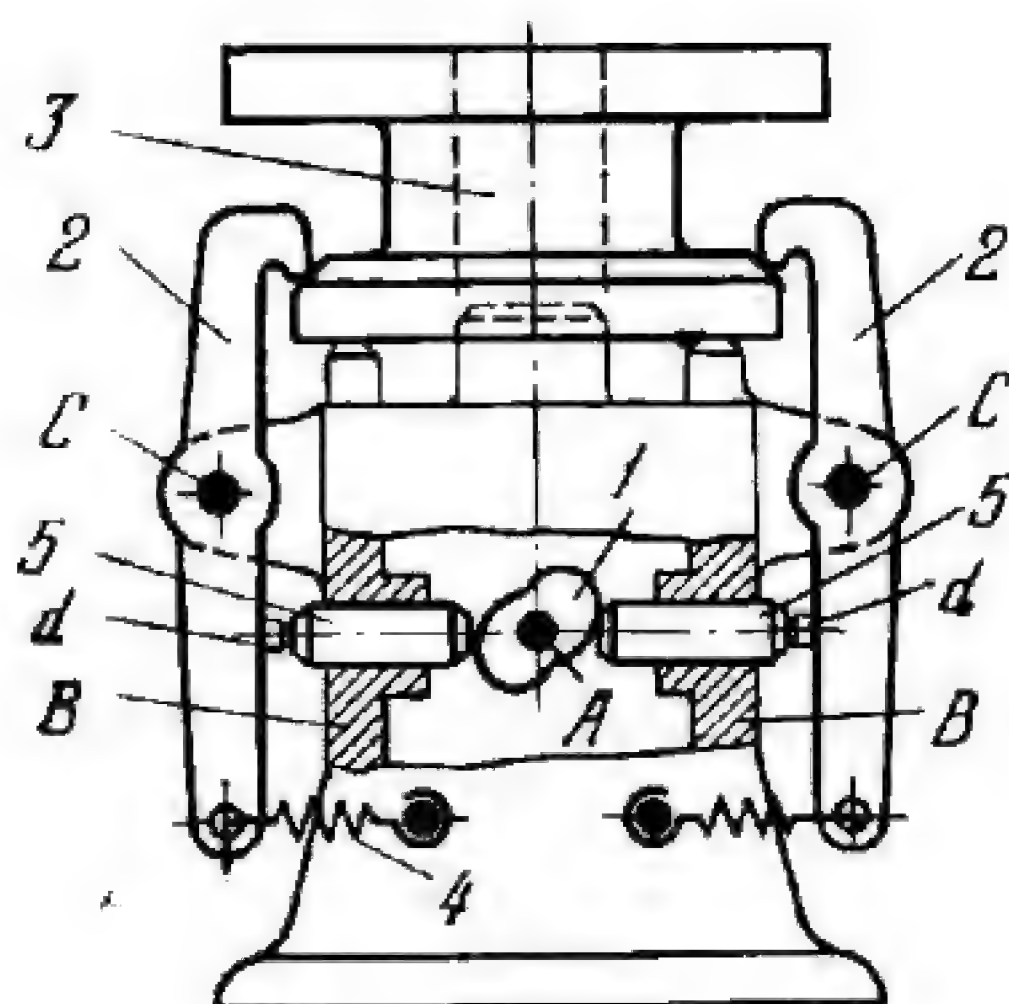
turns about fixed axis A and acts on symmetrically located pins (followers) 5 which slide in fixed guides B. When cam 1 is turned clockwise, pins 5 push against buttons d of hinged clamps 2, turning the clamps about fixed axes C to clamp workpiece 3. To release the workpiece, cam 1 is turned counterclockwise, after which springs 4 return clamps 2 to the initial unclamped position.
